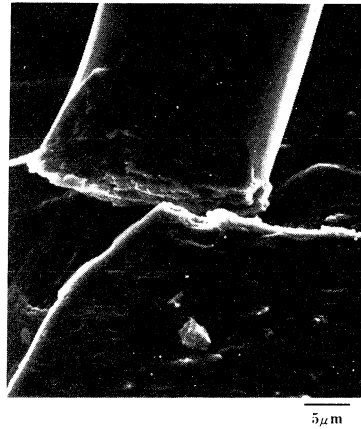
Bonding wire destruction by ultrasonic fatigue
